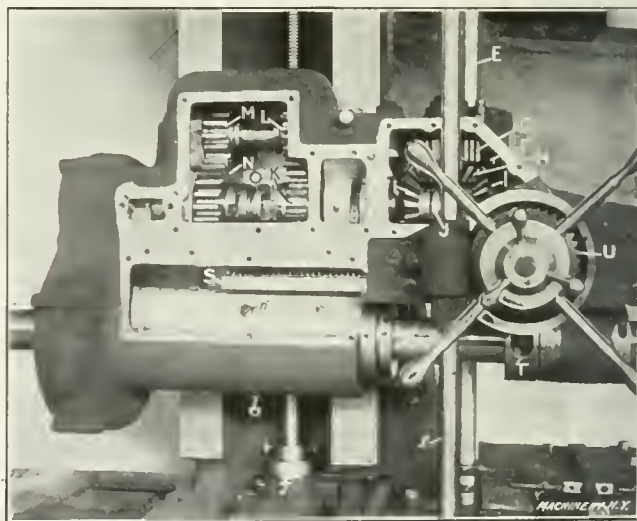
Spindle Head with Plates removed to expose Mechanism
